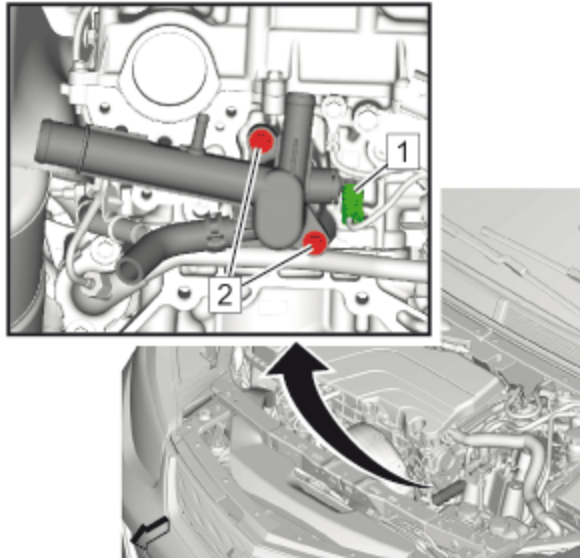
Engine Coolant Temperature Sensor Electrical Connector And Water Outlet Bolts
